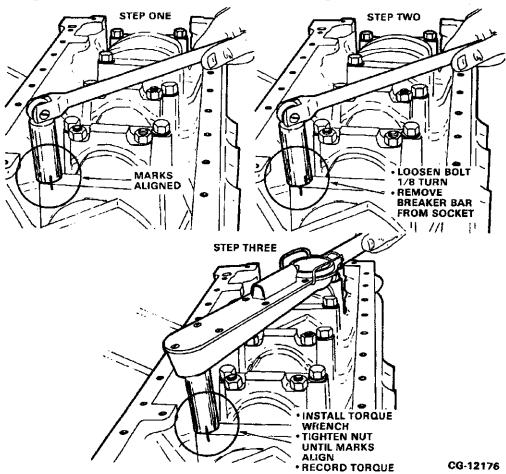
Check Bolt Torque (Using Pull-to-the-Mark Method)
